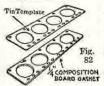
Procedure of fitting a gas-ket: (1) Remove cylinders. (2) Place cylinders on a bench, and clean both cylinders on a bench, and clean both cylinder flange and engine base thoroughly. (3) From a sheet of tin, make a template which is an exact reproduction of the base of cylinders, except that all openings, such as piston and both toles, are about 1/2" larger than those in cylinders. The templateis used as a pattern for mark-
